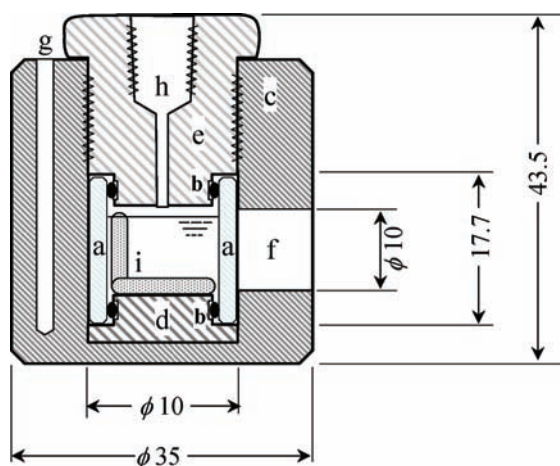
Cross-sectional view of the semimicro cell. Components: (a) sapphire tube, (b) o-ring, (c) outer housing, (d) lower support, (e) upper support gland nut, (f) view port, (g) thermowell, (h) hydrogen gas feed tube, (i) L-shape stirring bar. Cross-section is taken at 90° to allow view of the thermowell and one of the view ports. Dimensions are in millimeters.
